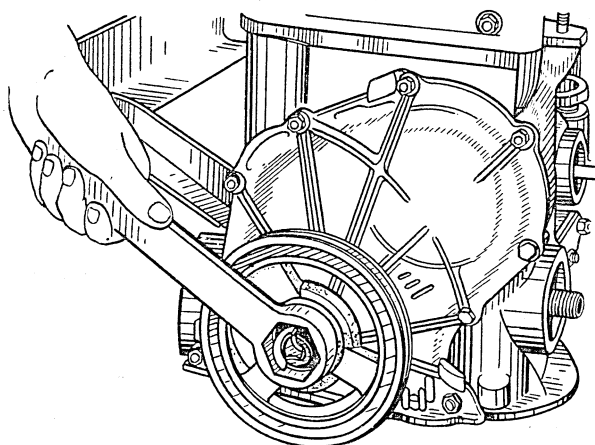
Unscrewing the Crankshaft Starting Jaw with Wrench A.50121
